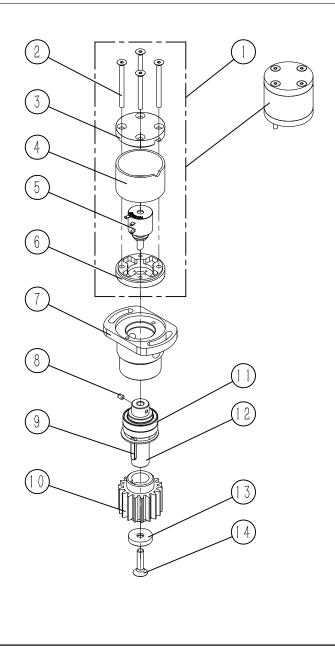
MB15.4 Drive System PARTS NO. INO. NAME QTY REMARKS XQJ1.5-BYT7 drive motor GB1096 6×6×18A ordinary type flat key ZYT24165-G23.9 steering unit steering feedback system components DZX24110.4 MB15.4.1 drive bracket welding BDZ1.4.1 turning gear BDZ1.4.4 shaft end ring GB70.3 M6×25 hexagon countersunk head screws BQD1503 drive unit TE30.4.6F09 cushion block 11 TE30.4.2F09 guide column  $\left(6\right)$ TE30.4.4F09 pressure plate GB2089 YA10 $\times$ 50 $\times$ 220 cylindrical spiral compression spring 2 TE30.4.5F09 nylon guide sleeve TE30.4.3F09 guide sleeve assembly GB97.1 10 flat cushion block GB6170 M10 hex nuts
